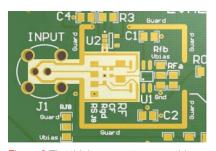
The thick copper trace on this PCB acts as a guard ring. The goldplated traces prevent corrosion. Remove the solder mask in the guarded area to reduce leakage.
